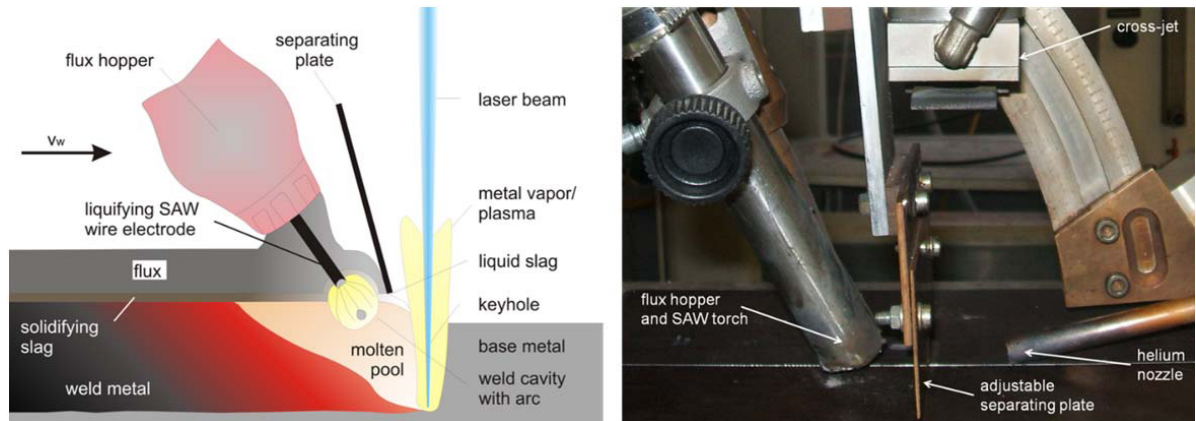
Laser beam submerged arc hybrid welding setup, schematic (left) and implemented setup (right).
